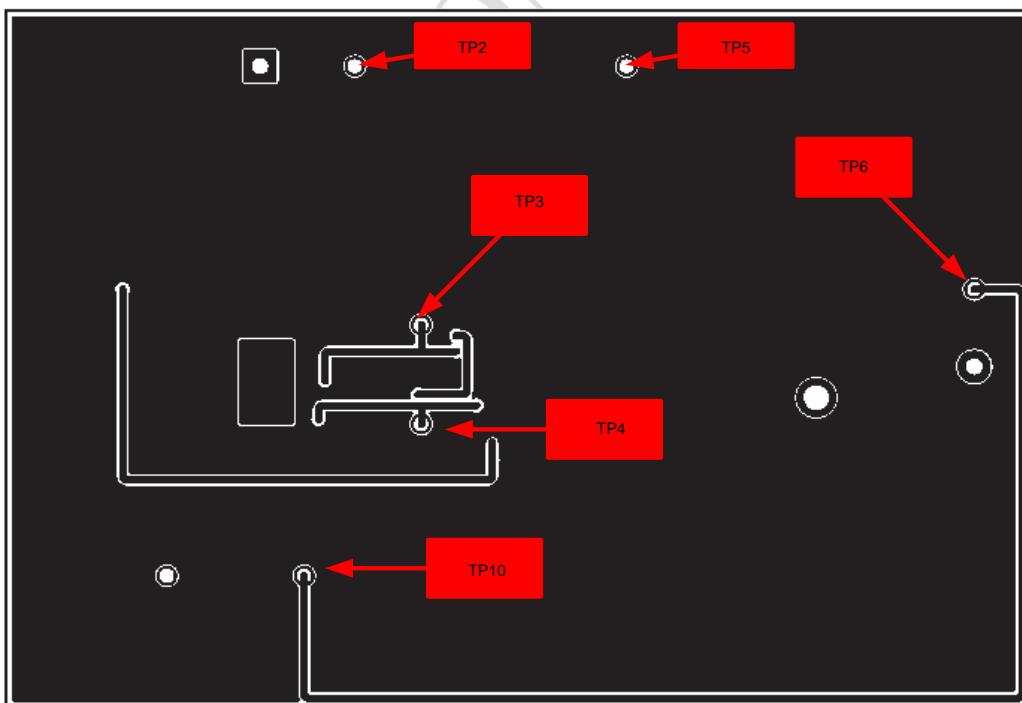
shows the application of the layout guidelines discussed previously. The Signal GND is connected to the GND, (Power GND – since this is an Evaluation Board and there is no other Digital GND), in a single point, which is pin 9.
